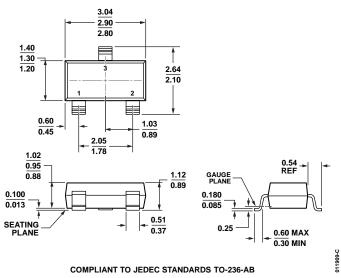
3-Lead Small Outline Transistor Package [RT-SOT-23-3] (RT-3) Dimensions shown in millimeters
